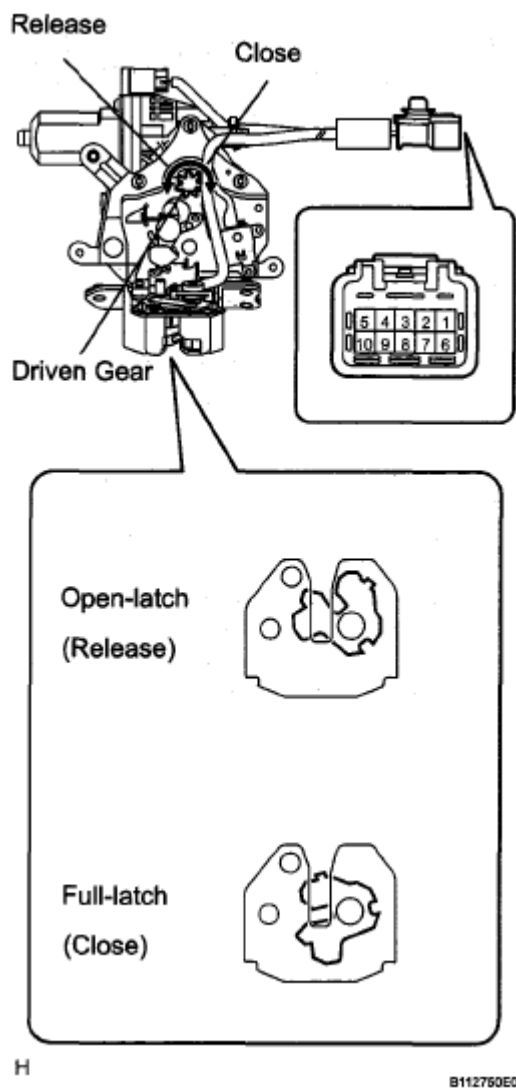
Identifying Back Door Lock Assembly Connector Terminals
